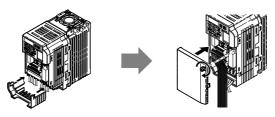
Reattach the Protective Covers on an IP20/Open-Chassis Drive
